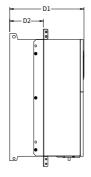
Flange mounting dimensions and hole positions for VFDs of 380V 090G-110G
